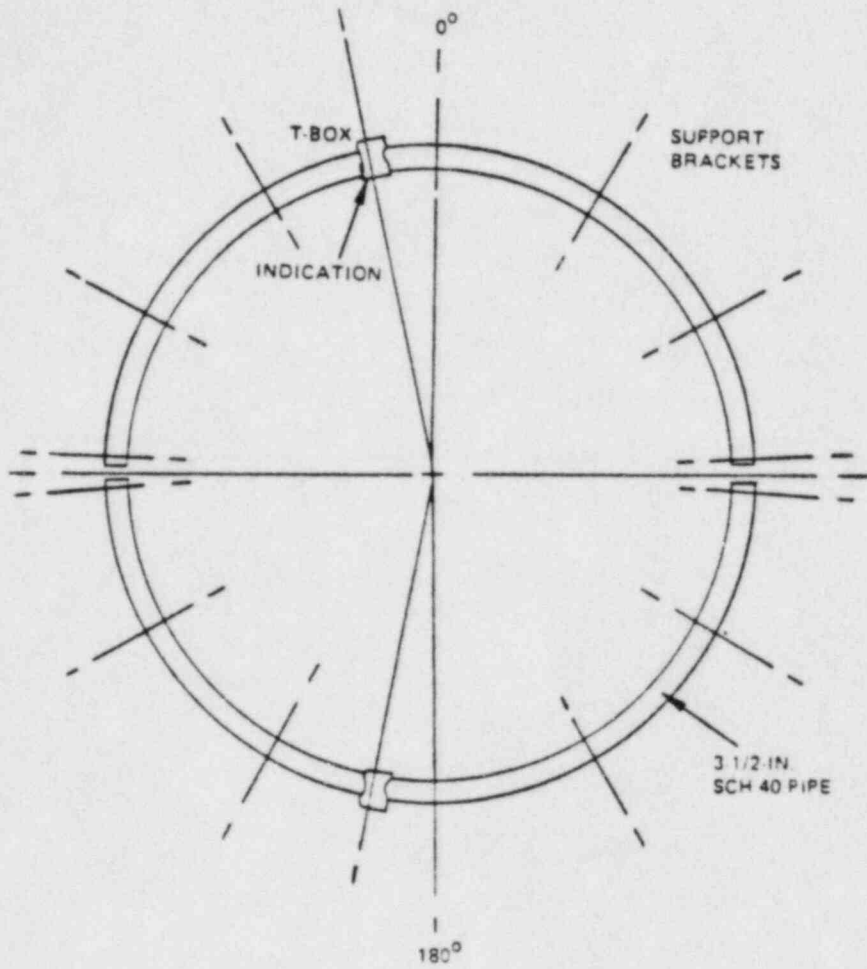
Plan View of Cracked Core Spray Sparger
